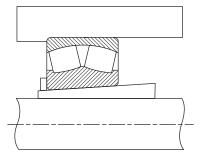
Spherical roller bearing mounted with an adapter sleeve.
